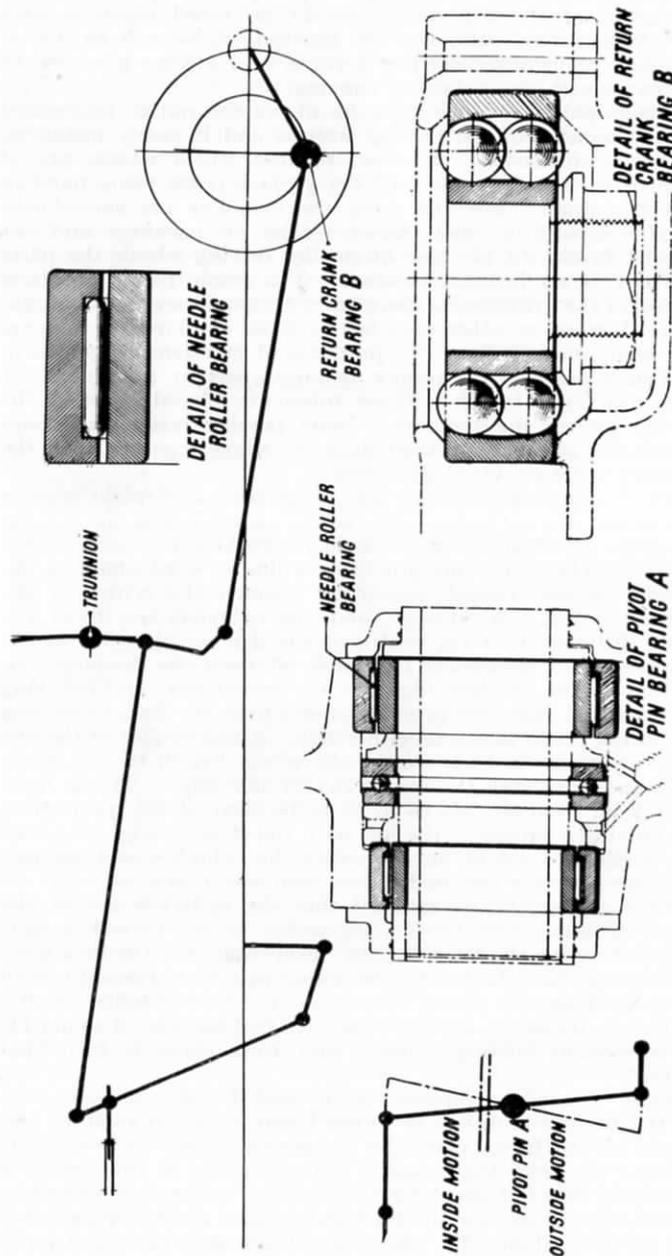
DETAILS OF NEEDLE ROLLER BEARINGS AND BALL BEARINGS OF L. M. S. R. LOCOMOTIVE VALVE GEAR.
